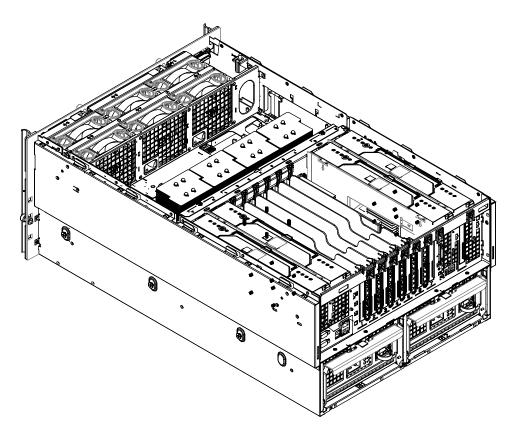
Server Platform, Isometric Rear View with Top Cover Removed
